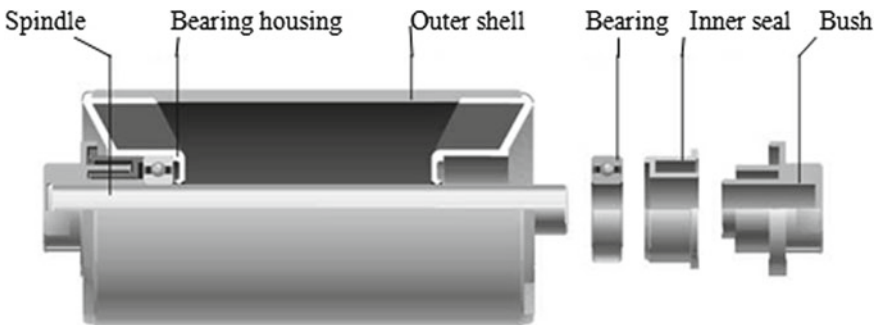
Solidworks model of assembly parts of roller (Idlers)
